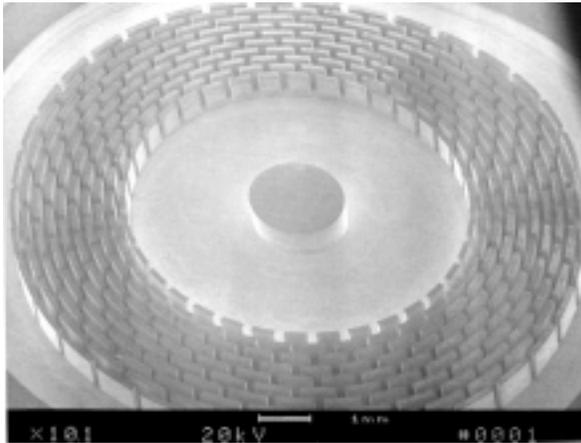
EDM plunge electrode electroplated in copper 1 mm thick X 15 mm diameter. The circular arrangement of pads produces a mesh for the neutron tube design.
